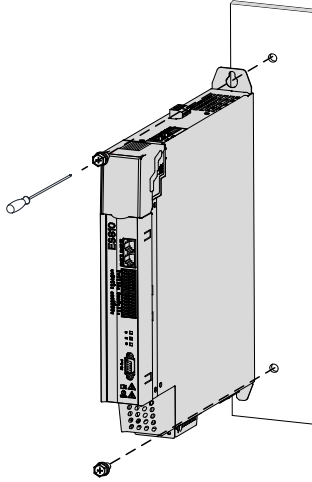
Backplate mounting of ES810-50M4T005-xx to ES810-50M4T013-xx (50-mm wide)
